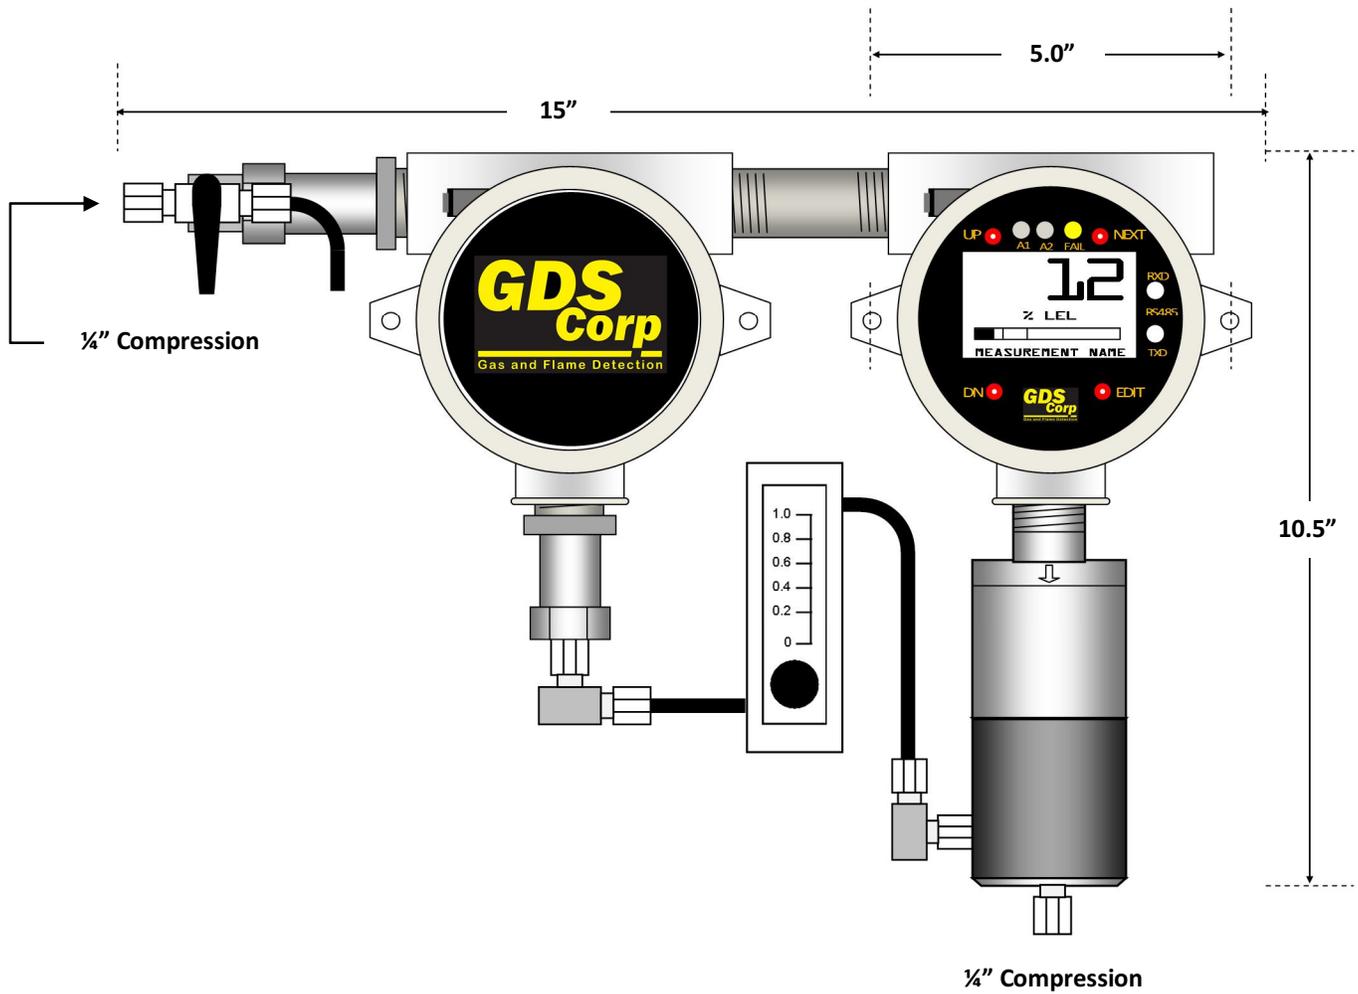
GDS-58XP Dimensions (Aluminum Enclosure)
